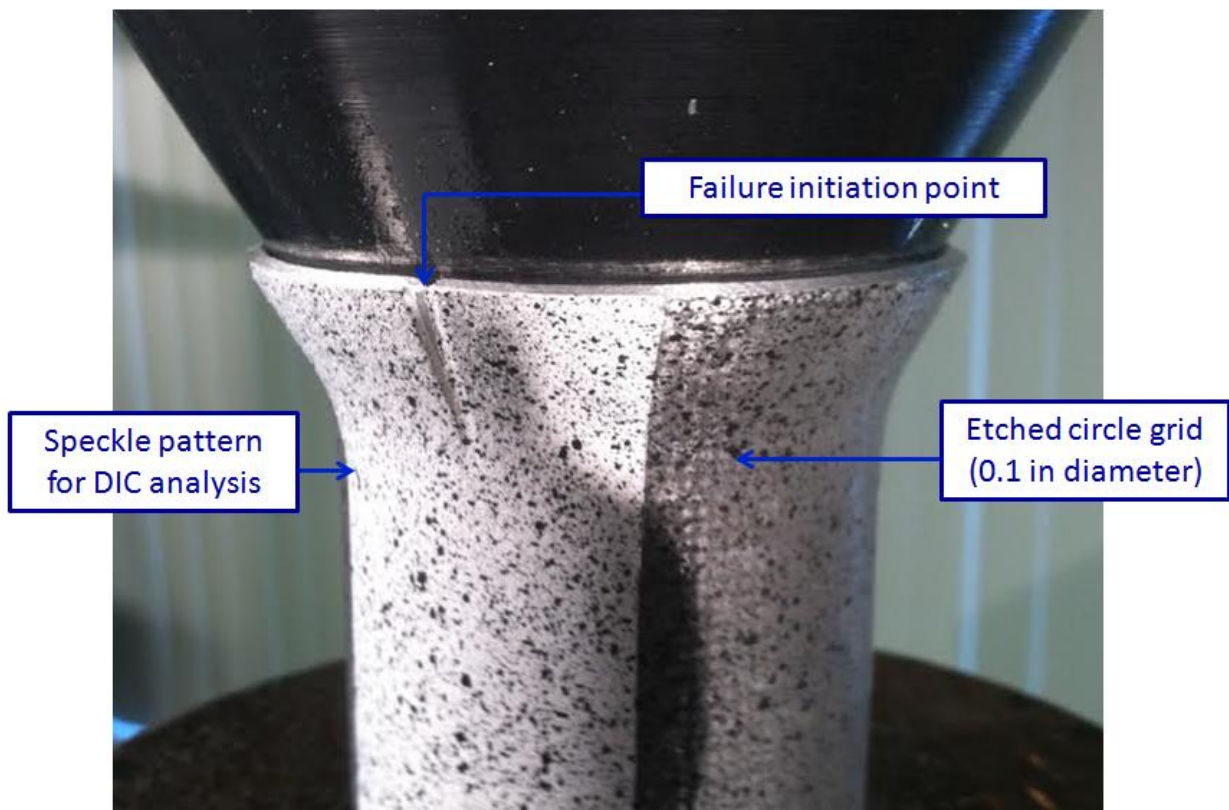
Flaring specimen Al61T4-FL-5 at failure.
